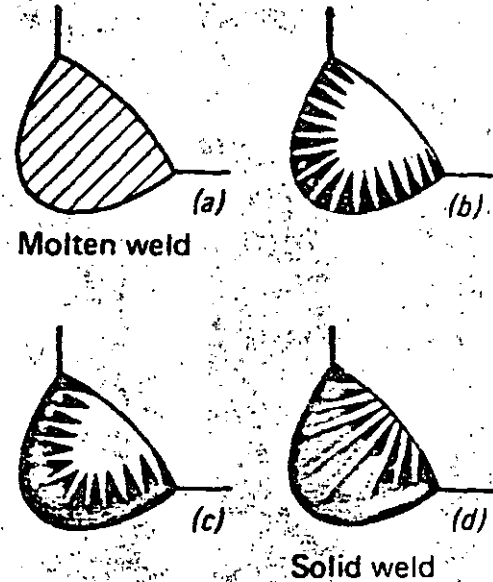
A molten fillet weld (a) starts to solidify along the sides next to the plate (b). Solidification proceeds as shown in (c) and (d).
